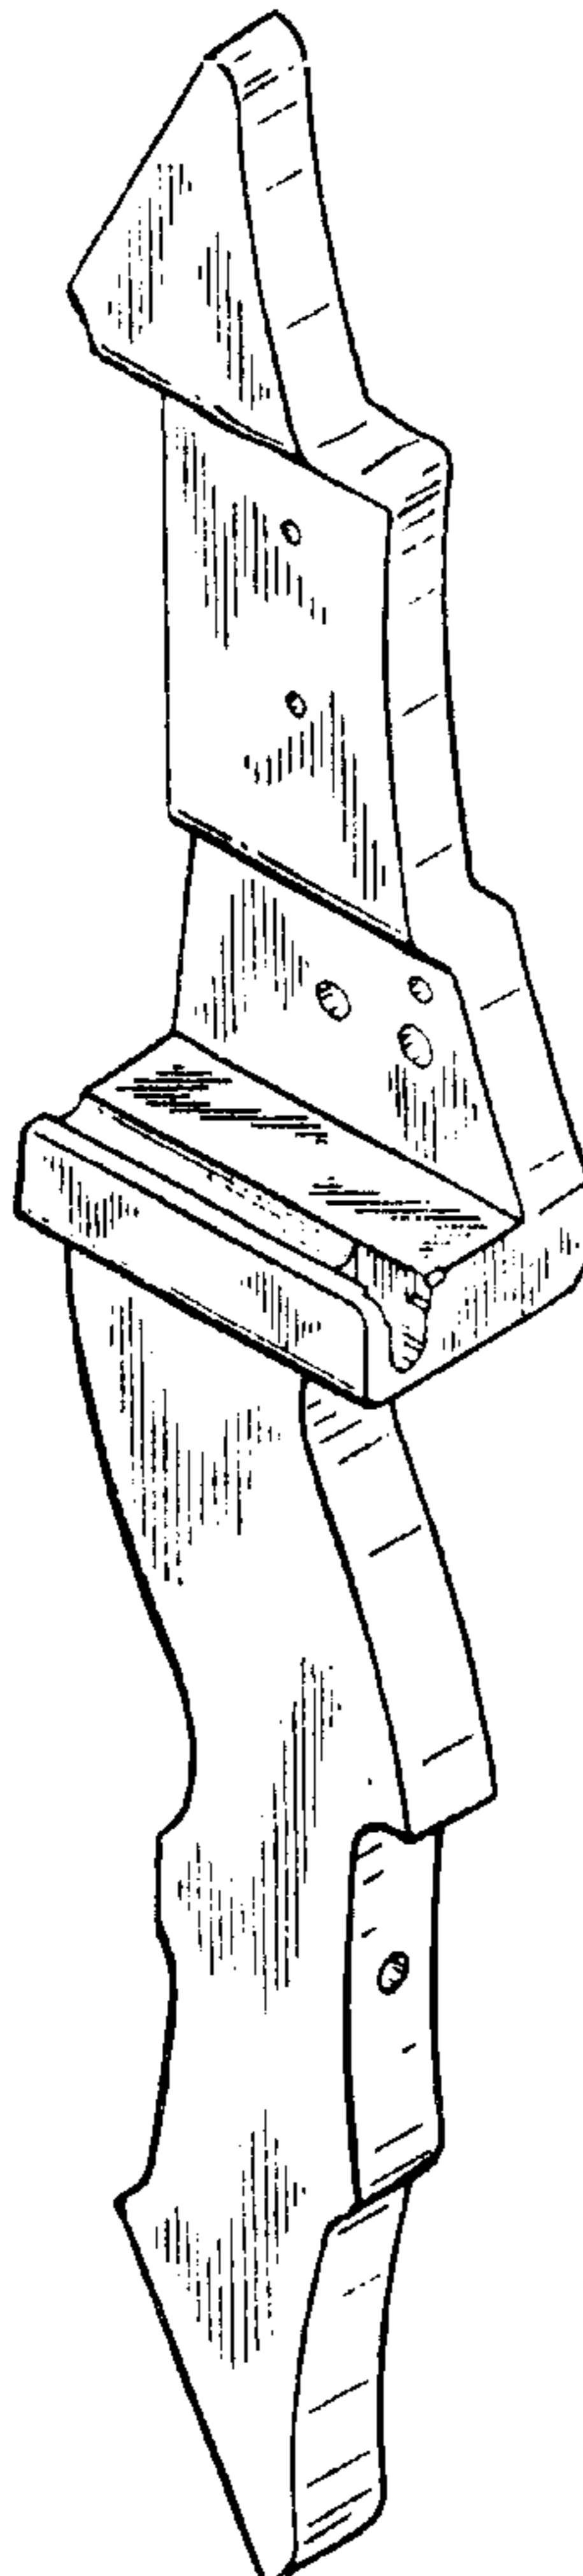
is a front elevational view of the bow riser shown in FIG. 1;
